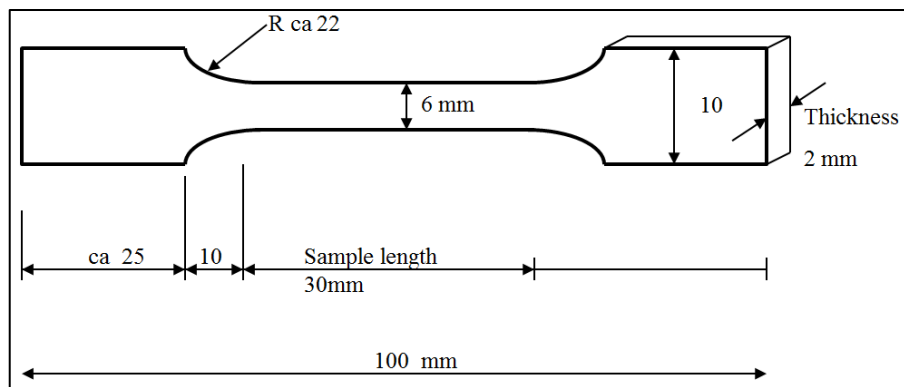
Specimen geometry for tensile tests of weld simulated samples.
